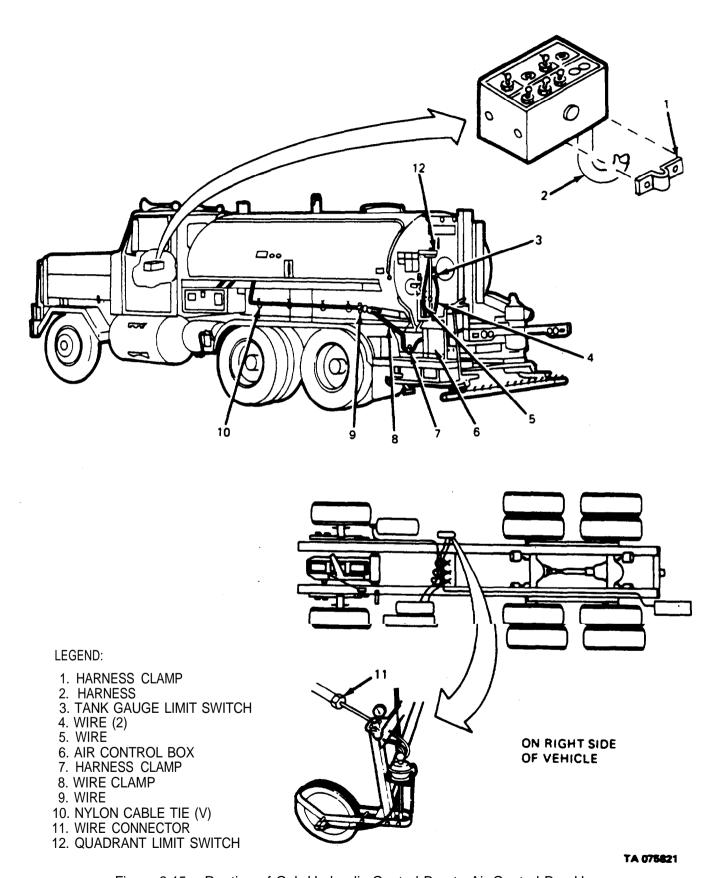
Routing of Cab Hydraulic Control Box to Air Control Box Harness.
